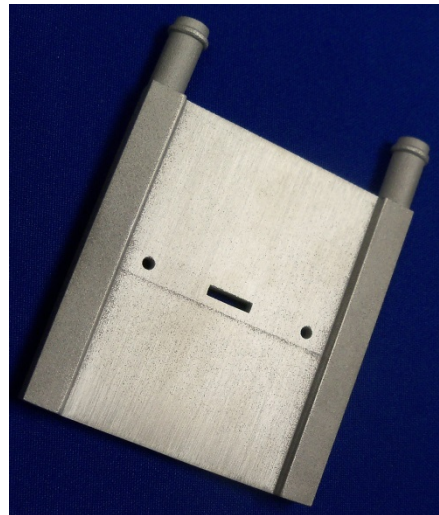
3-D printed aluminum pin fin cold plate.
